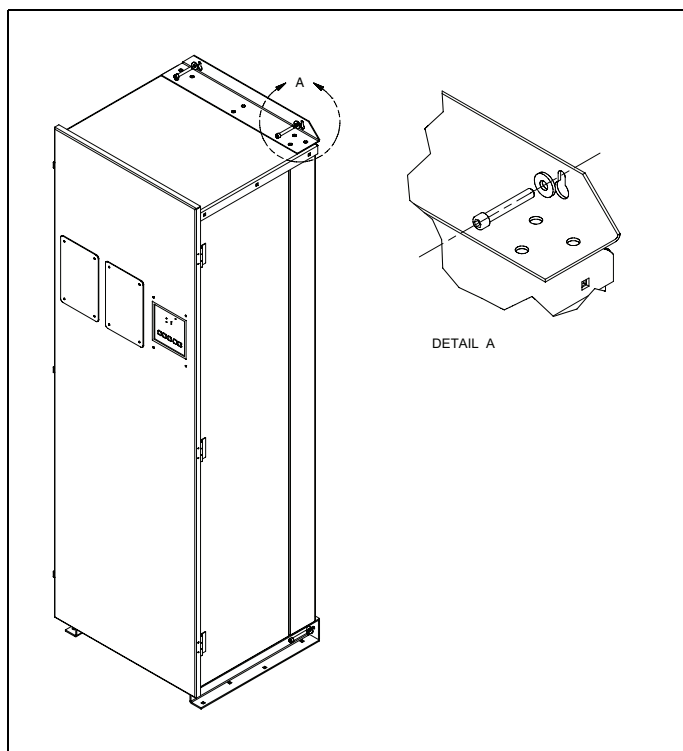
Typical Mounting of the ATS to a Mounting Surface.
